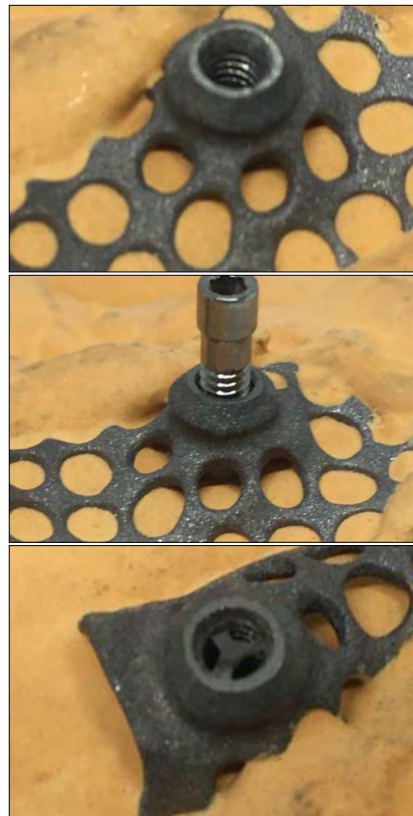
Examples of unsuccessful machining outcomes of one-piece-printed metal structures
